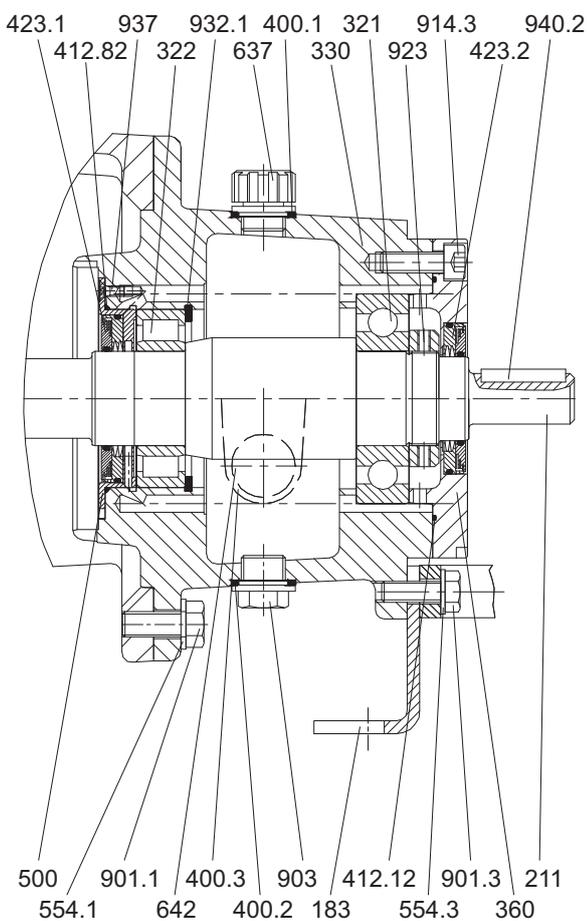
Bearing bracket (oil-lubricated bearing with labyrinth seals)
